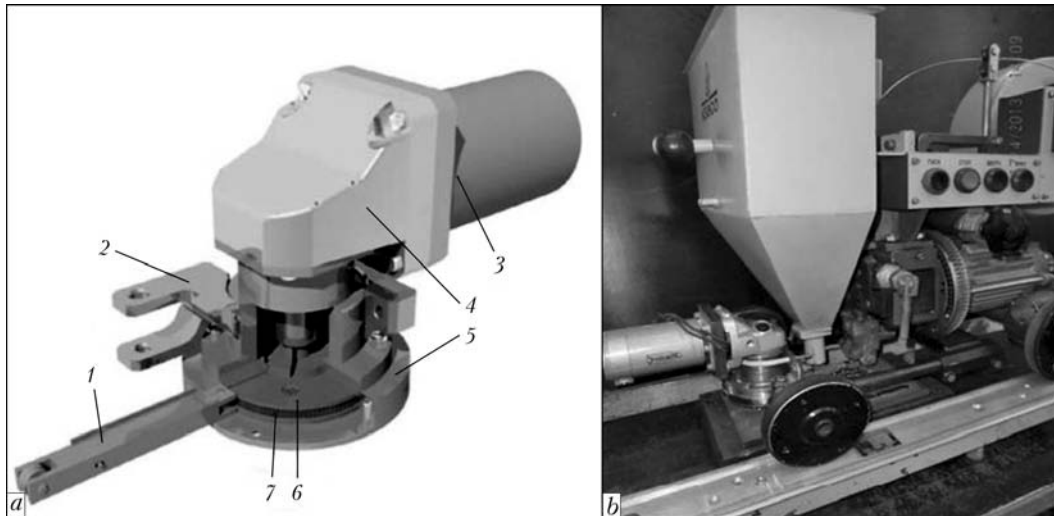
Design of generator of high-frequency pulsed movements of electrode (a) and its mounting on welding tractor (b): 1 – striker; 2 – fastening bracket; 3 – electric motor; 4 – reduction gear; 5 – body; 6 – driven washer; 7 – set-up rollers
